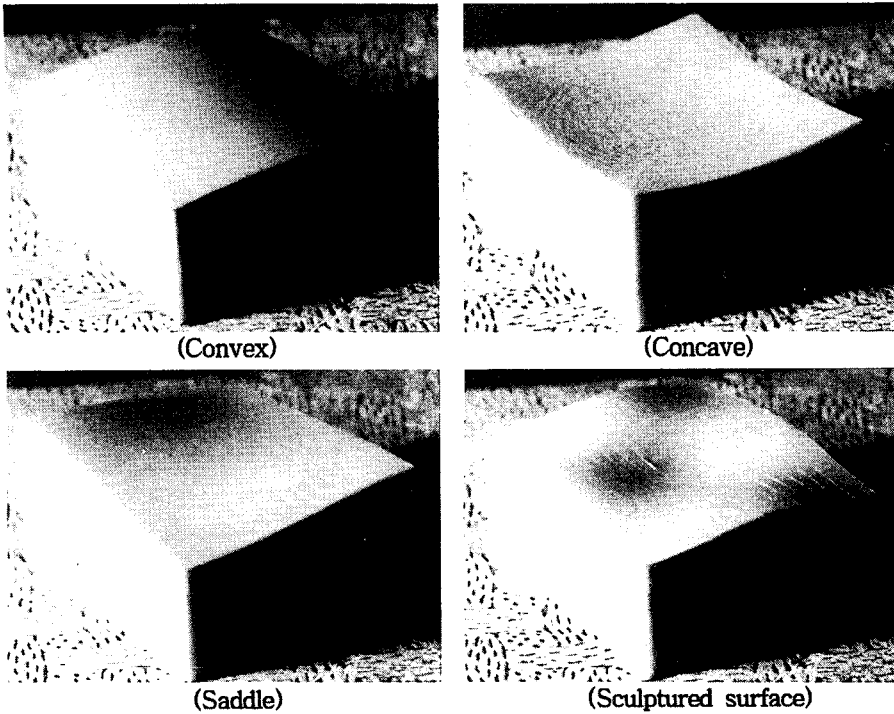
Convex, concave, saddle and sculptured surface machined by 5-axis CNC milling machine with the end mill
